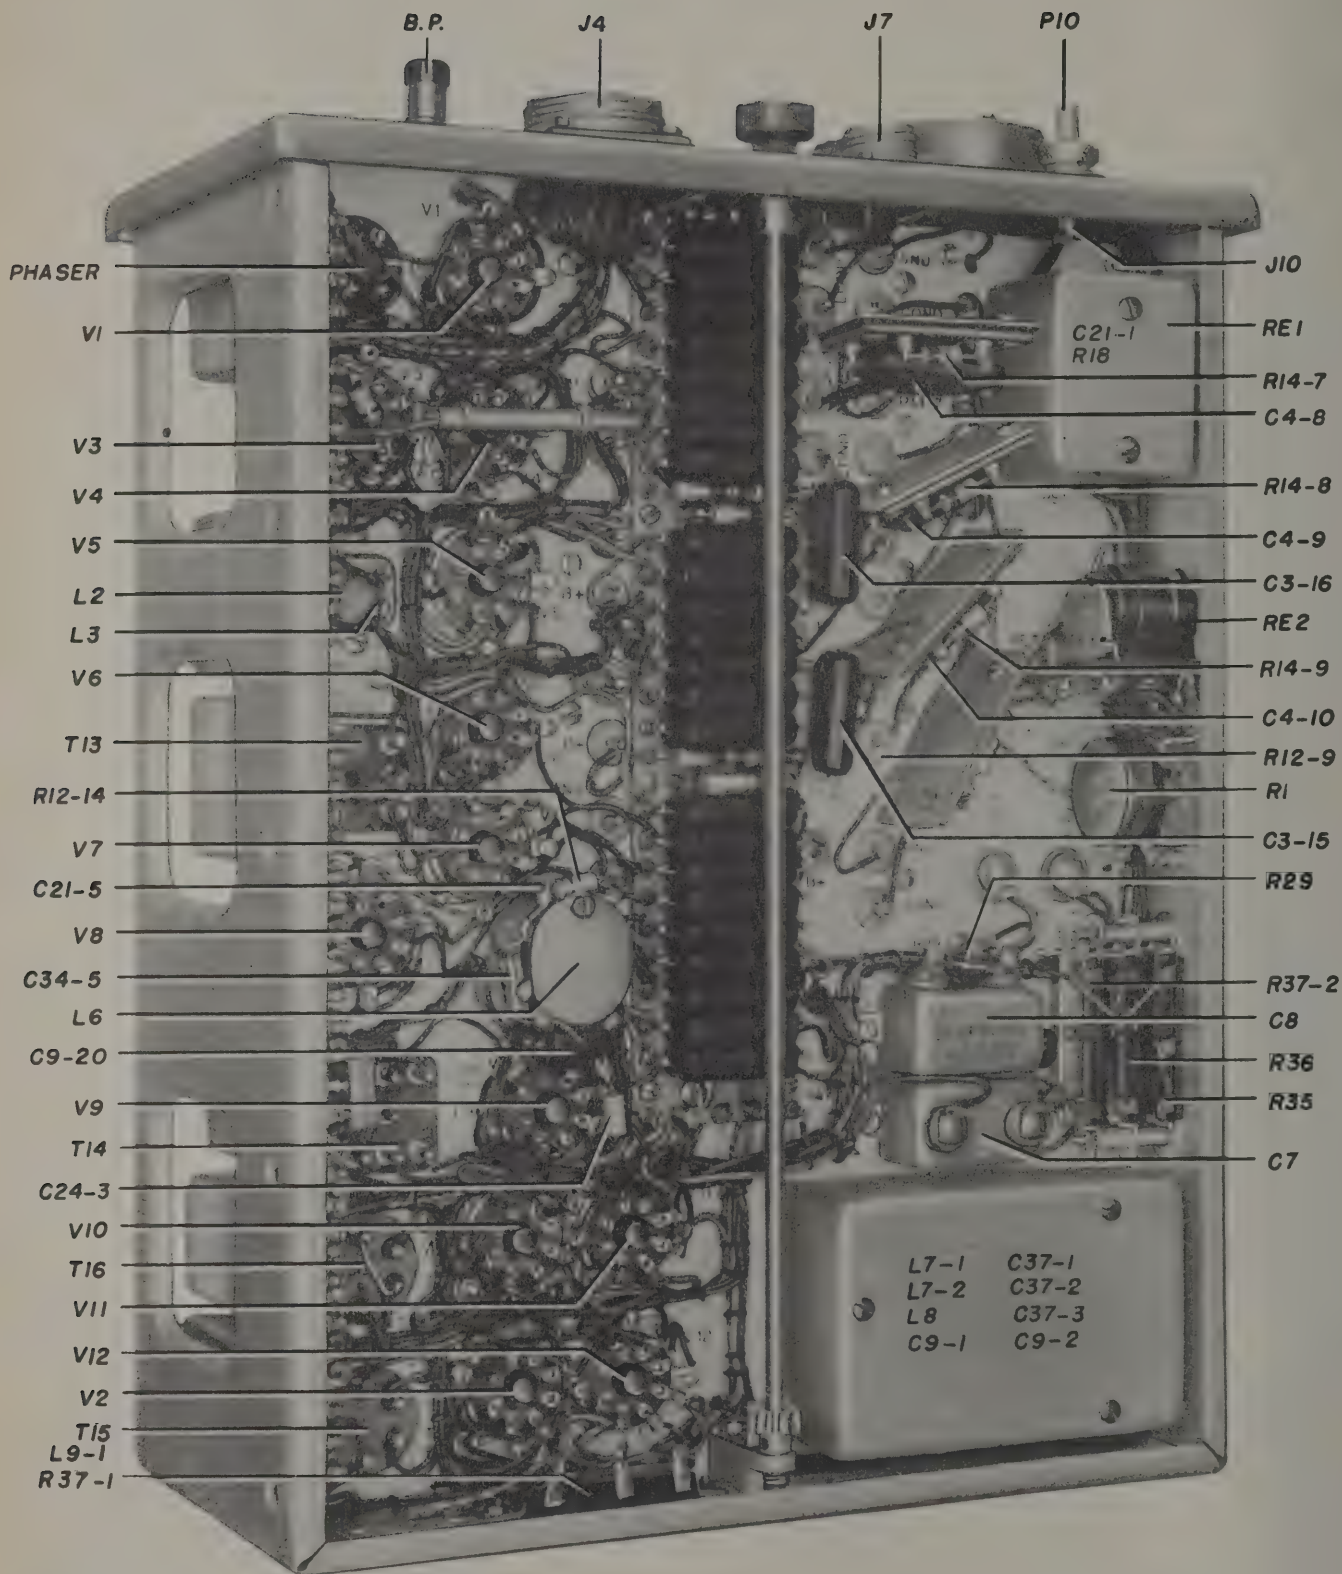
Type MN-26* Radio Compass, Left Bottom View of Chassis
